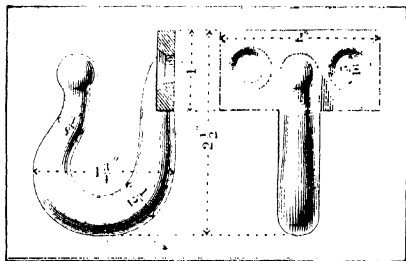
A DRAWING EXERCISE -- HOOK HANGER.
